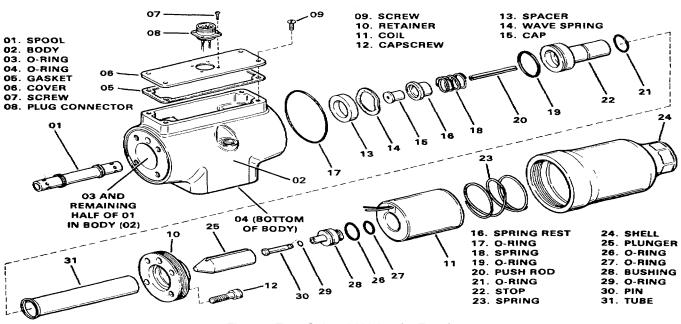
E-3. Solenoid Valve (36Z646) 4E-9
